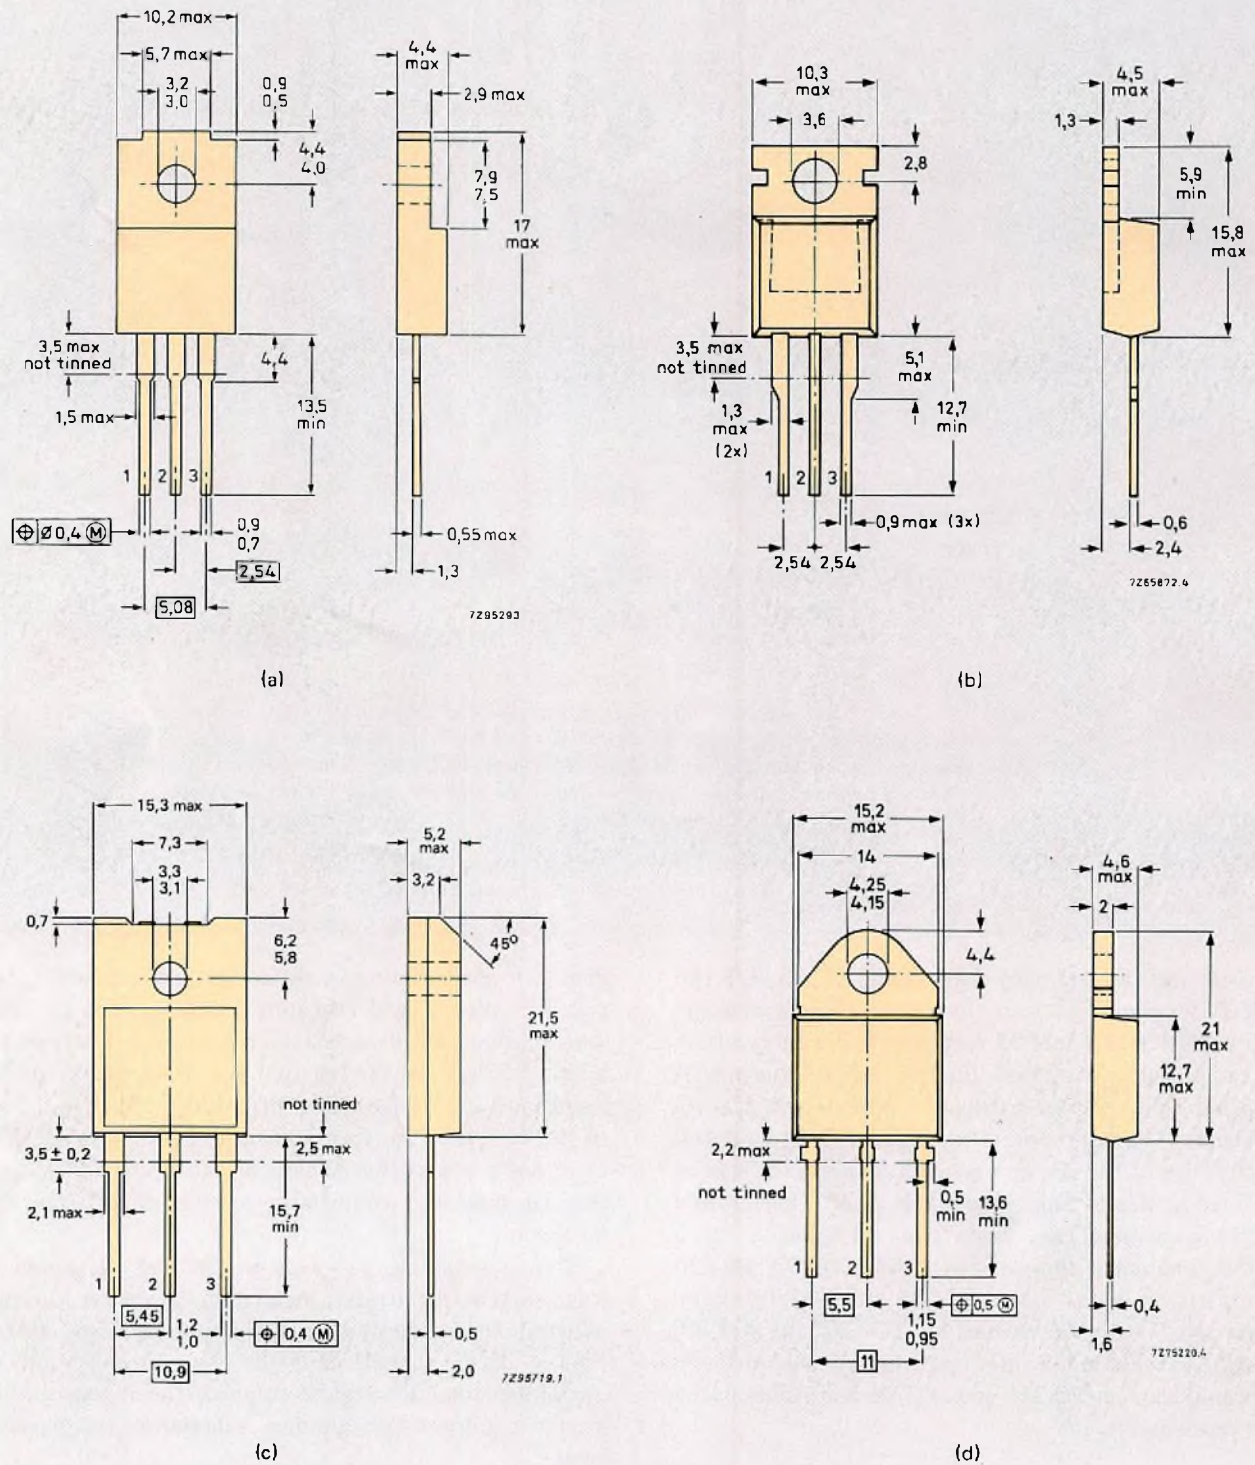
Dimensions of (a) SOT-186, (b) TO-220, (c) SOT-199 and (d) SOT-93 encapsulations. Outwardly similar to a TO-220 encapsulation, a SOT-186 encapsulation is distinguished by its integral insulator, flatter leadframe and thicker tab. Besides its integral insulator, the main distinguishing feature of a SOT-199 encapsulation compared with a SOT-93 is its larger body
